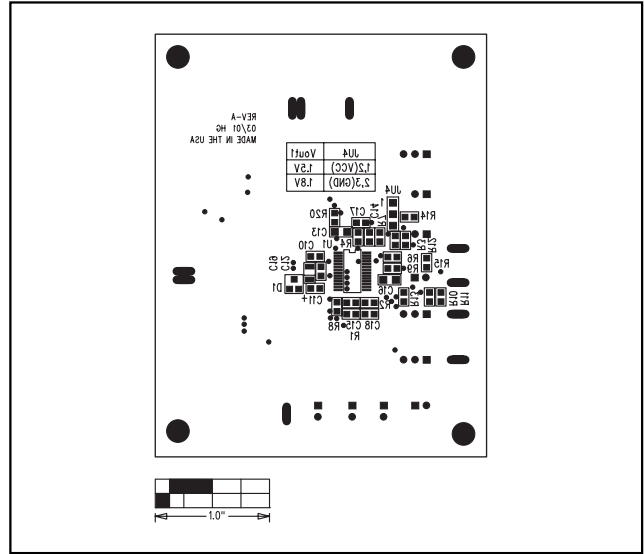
MAX1845 EV Kit Component Placement Guide—Solder Side
